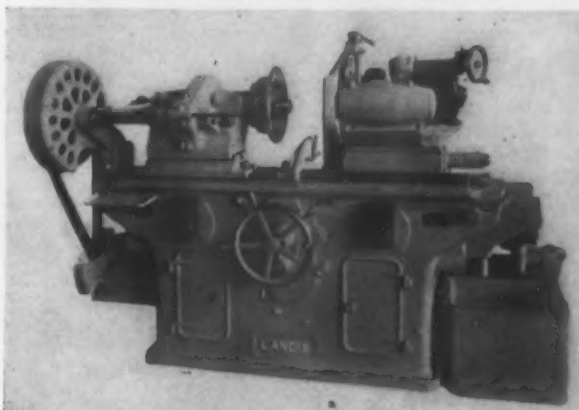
(Left) Front View of Machine Arranged for Grinding External Brake Drums
